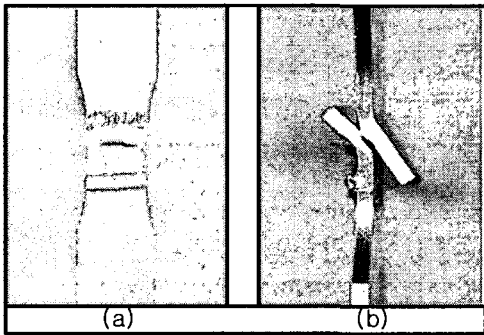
Fracture front(a) and lateral(b) face of tensile shear test specimen Lap-jointed by FSW
